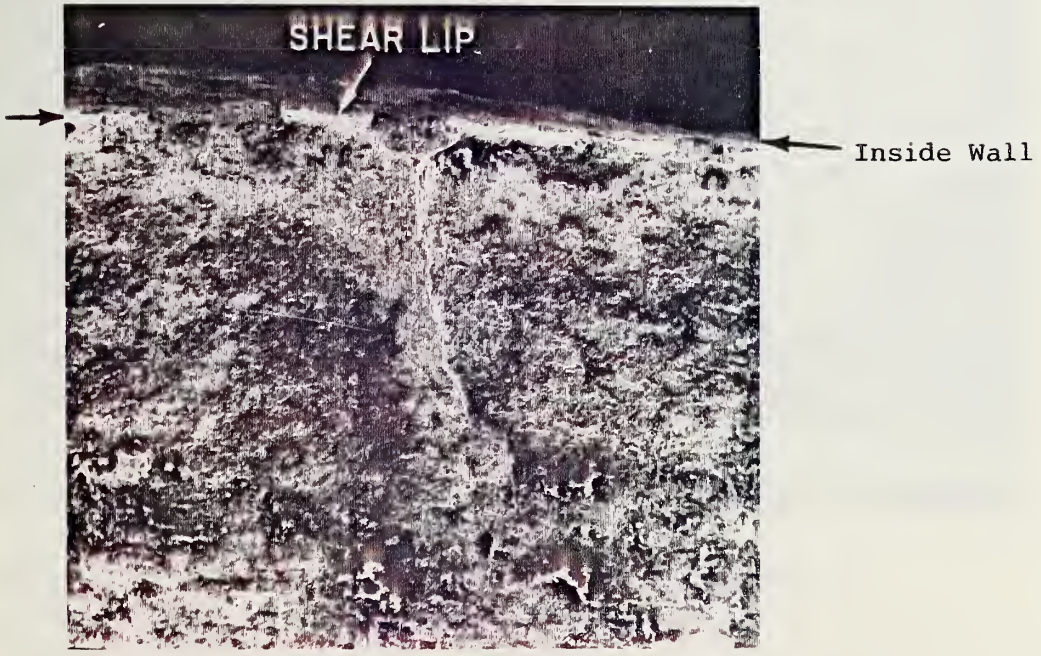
Close-up view of step on fracture surface. Shear lips show up as intermittent white markings along inside wall. These shear lips are probably in the decarburized layer (see Section 5.3).
